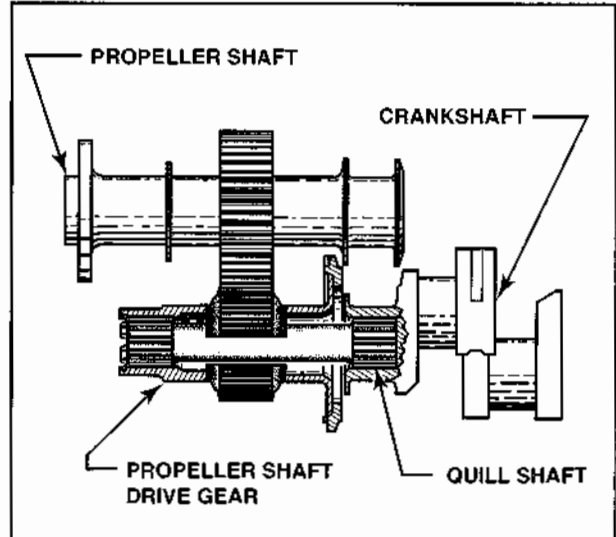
A quill shaft minimizes torsional vibration between a propeller shaft and the crankshaft.
